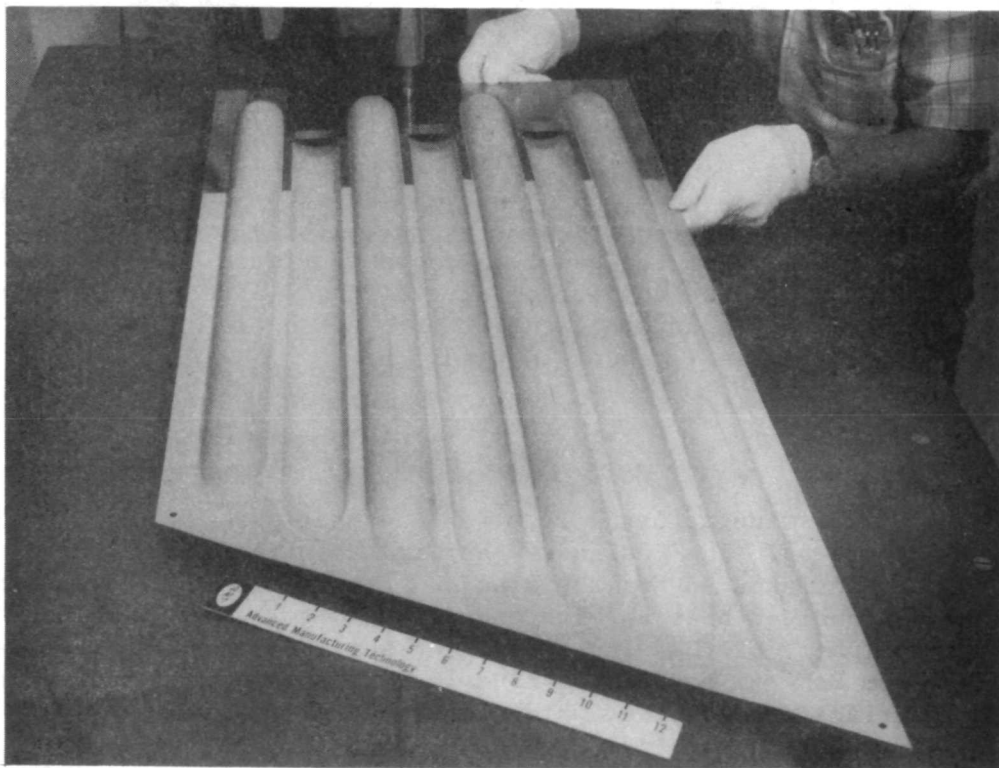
Spot Welding of Doubler to Beaded Panel
